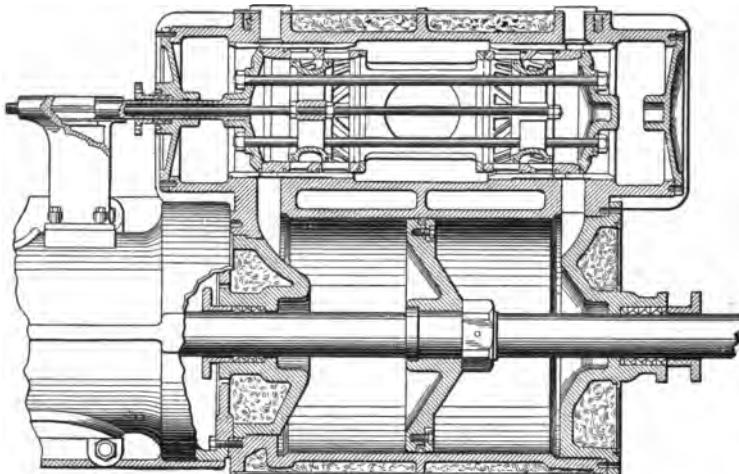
Section of Large Cylinder Showing Packing and Shape of Piston and Heads.
